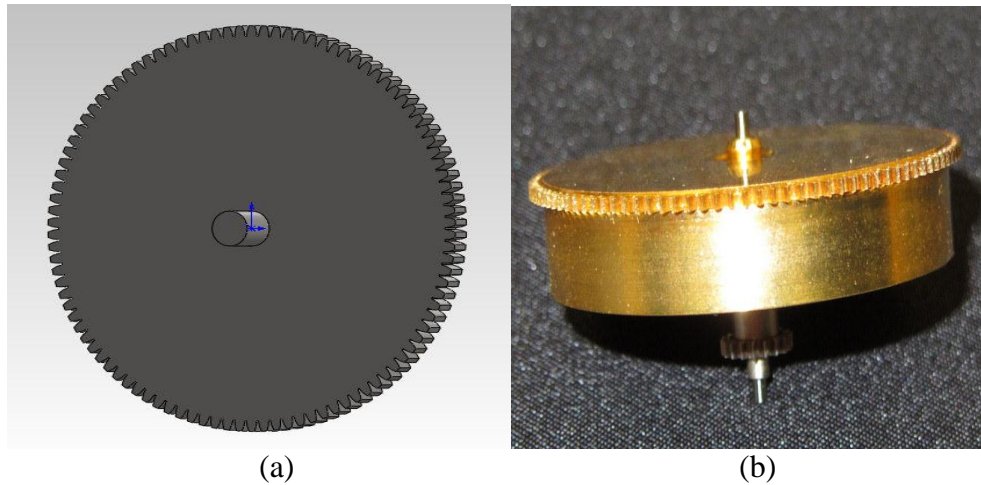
Great wheel, W_{11} , of the gear train (a) Solidworks view, and (b) canister with attached ring and fitted with winding arbor driven by the click wheel assembly
